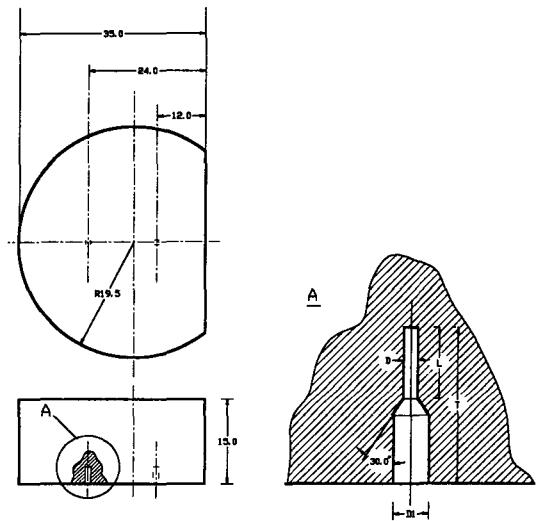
Drawing of the Cr-Ni steel specimens with artificial flaws, flat-bottom holes.
